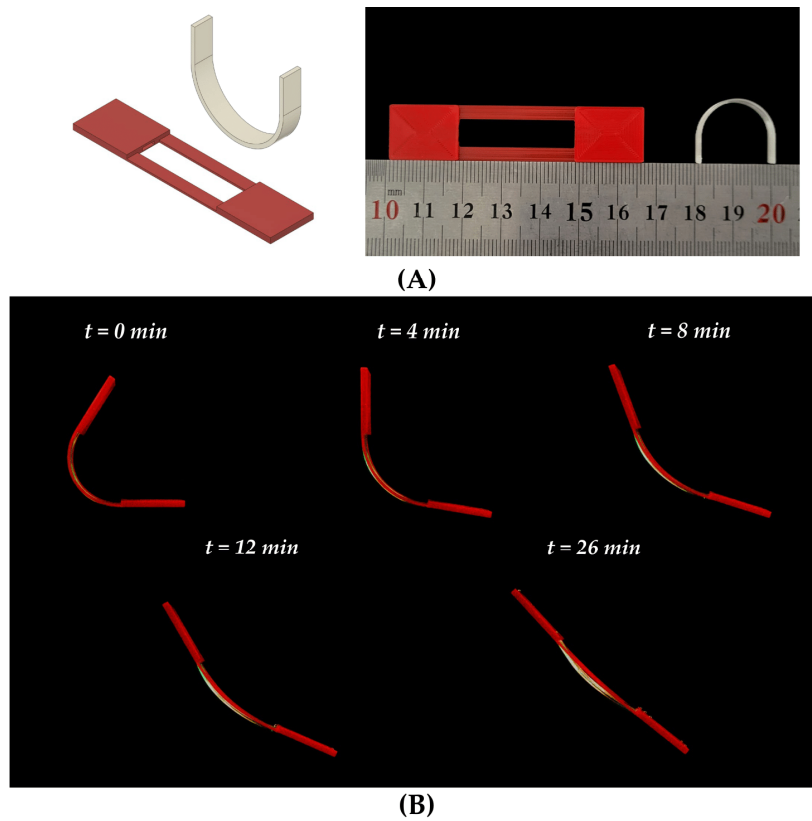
(A) CAD models & prototypes and (B) shape-morphing test for actuator 38.
